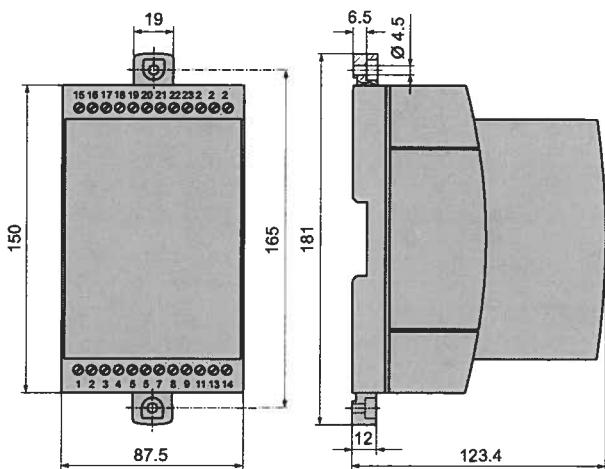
DMT-1040 in housing T24 screw hole mounting brackets pulled out.
